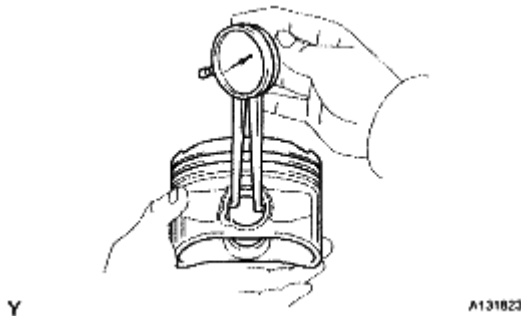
Measuring Inside Diameter Of Piston Pin Hole
